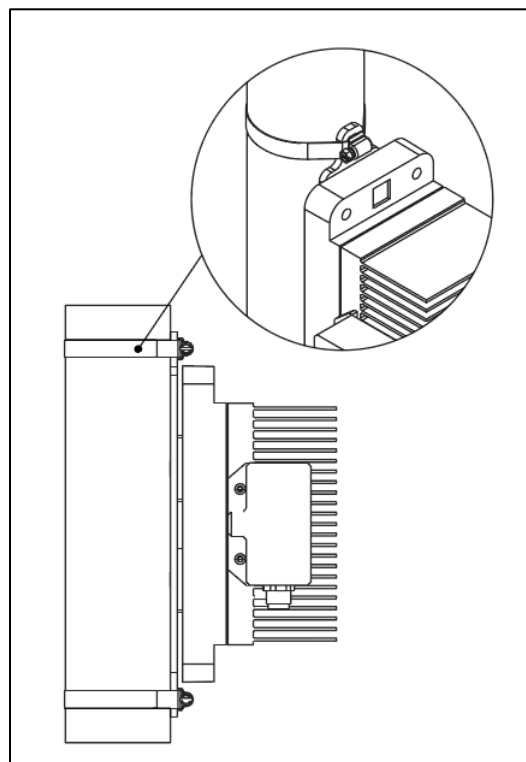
Mounting kit accessory – fixing plate MEP-0004 – Optional accessory
